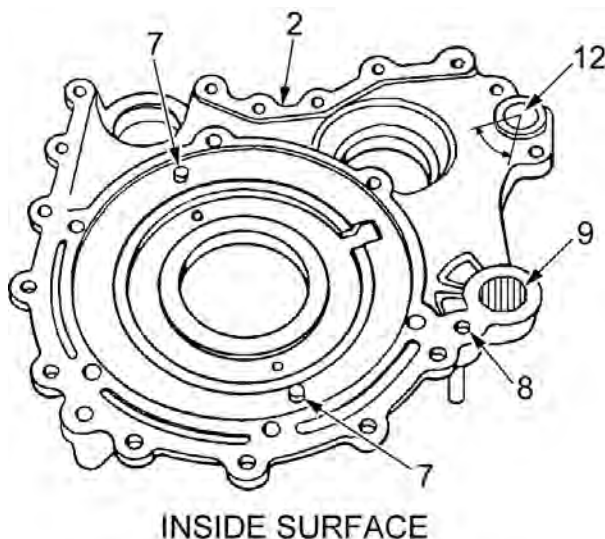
Pins, Needle Roller Bearing, and Plug Valve Installation.
